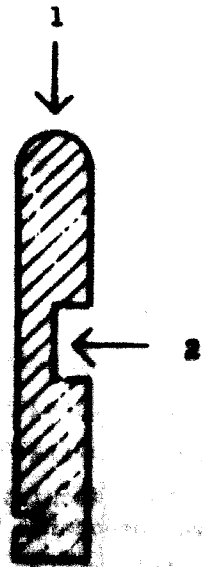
Figure III. A final profile, including three machining phases, produced by a four-sided moulding machine
